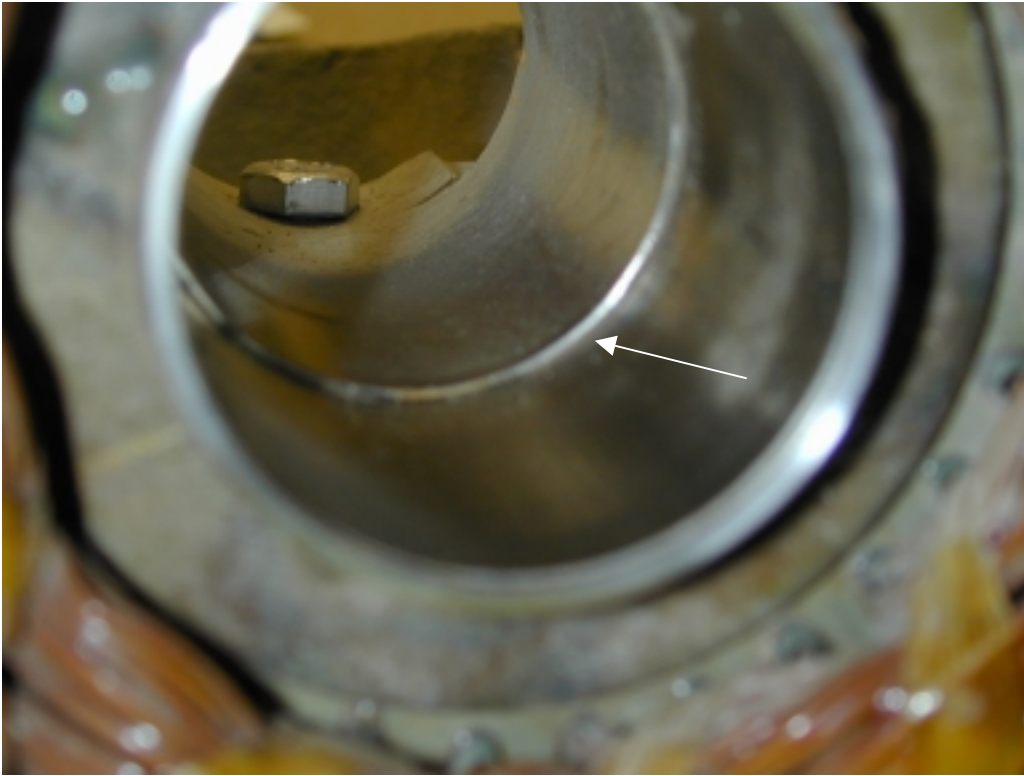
Close up of the shoulder which takes the thrust force from the main bearing to the housing.
